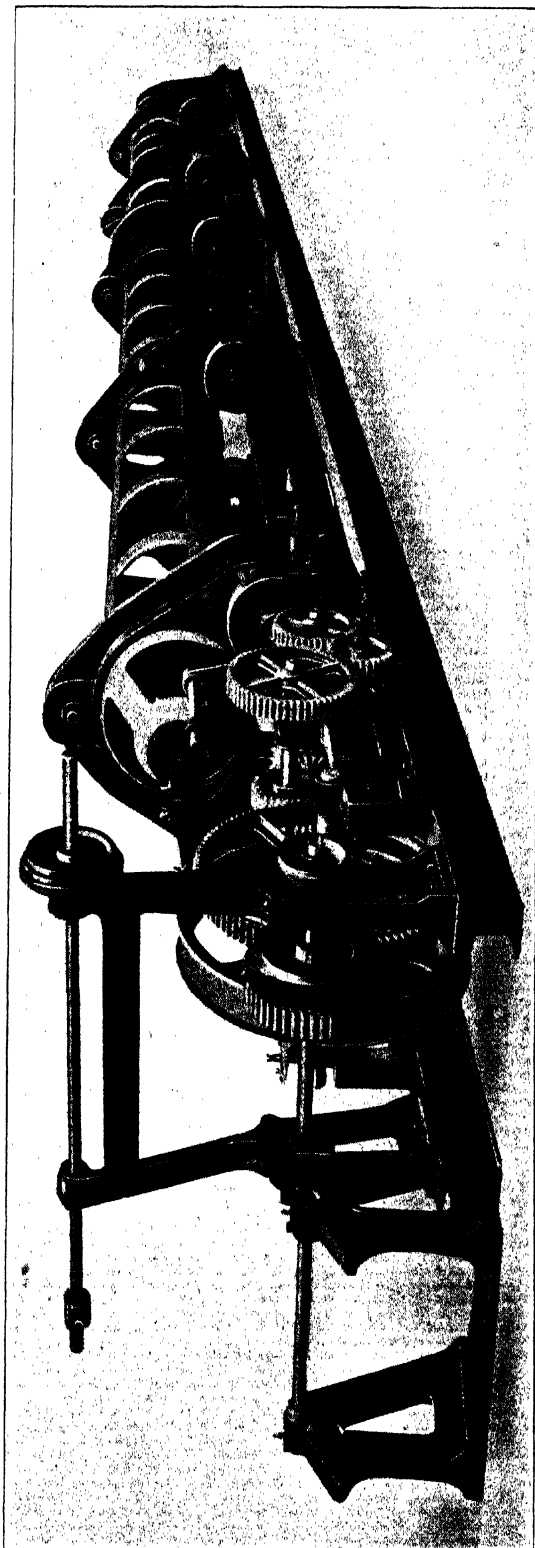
SEVEN-BOBBIN STRANDING MACHINE WITH GUARDS AND LIFTING TROLLEY.
